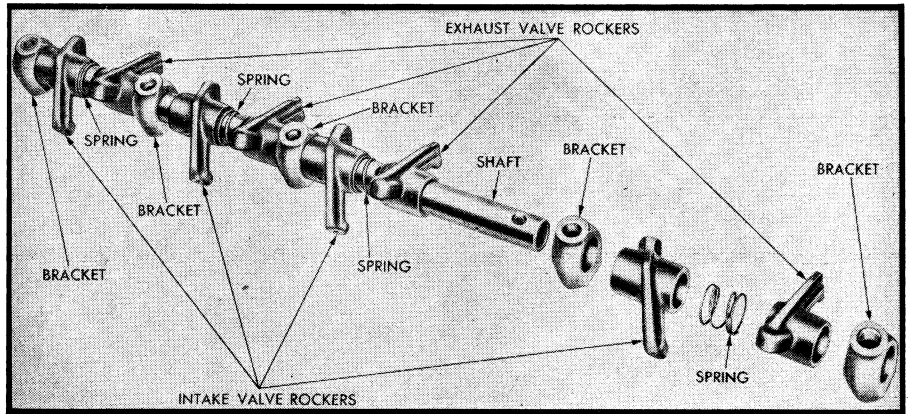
Layout of single rocker arm parts. 1954-58 V8 engine
